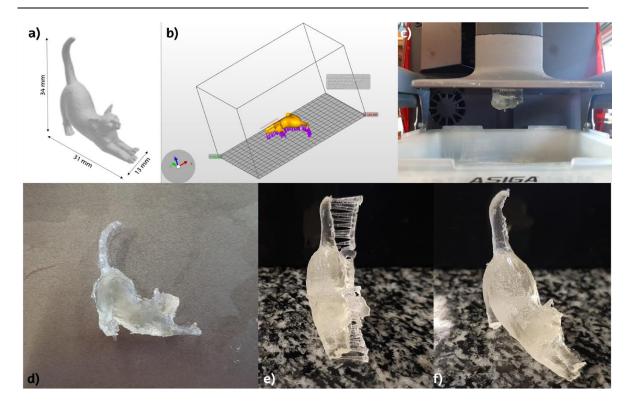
(a) 3D design of the piece, (b) 3D model of the piece and the support structure of ASIGA Composer software, (c) printed piece on the build platform after printing, (d) printed piece after cleaning with ethyl acetate, (e) printed piece with the support structure, (f) final printed piece.
